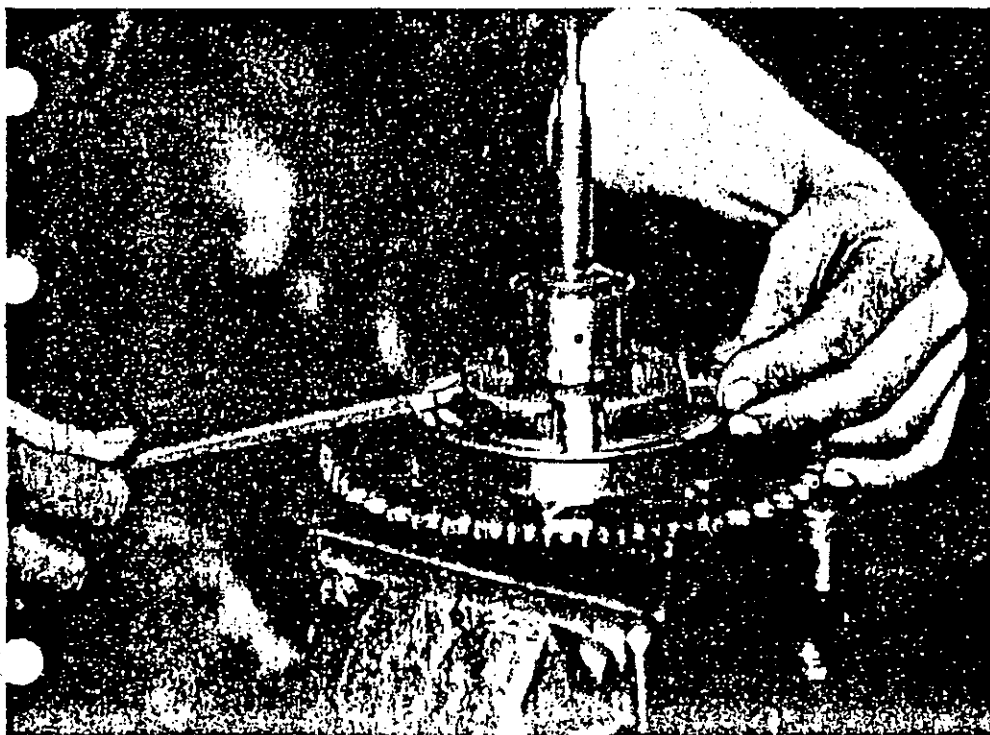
HOW TO LOCATE THRUST LEVER SCREWS.
